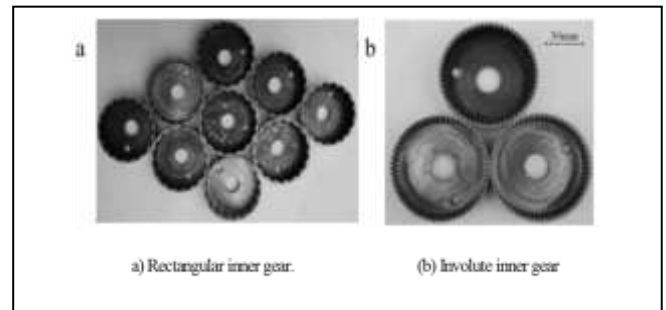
Trapezoid and involutes inner gear spun parts [28]
